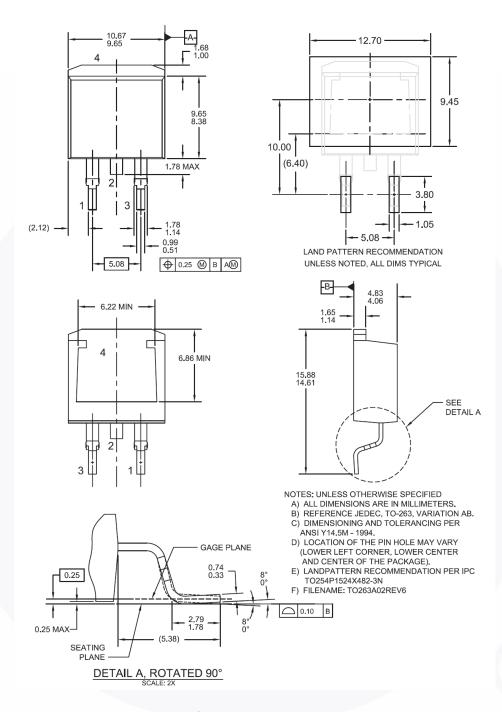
TO263 (D²PAK), Molded, 2-Lead, Surface Mount
